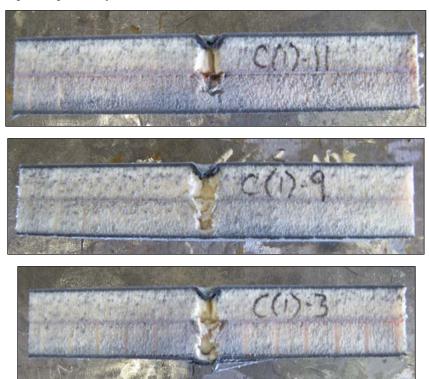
Bisected samples showing internal damage from the 15.9 mm (0.625 in.) tup.
